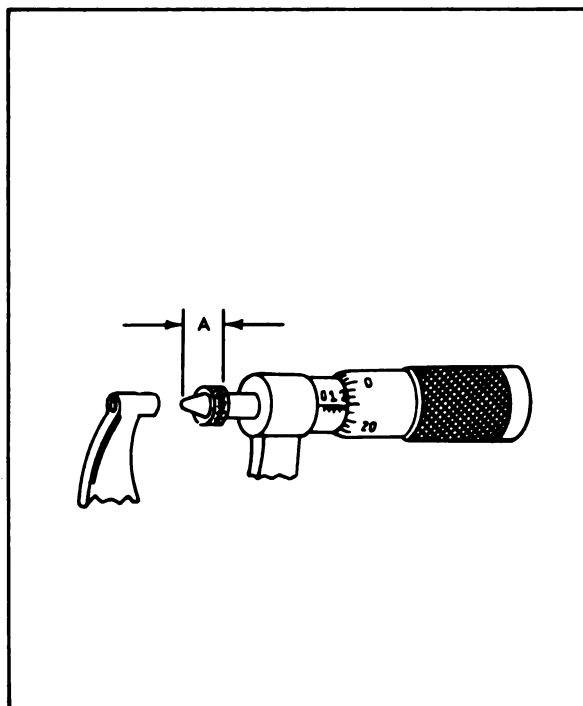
Modifying Hand Micrometer for Indent Inspection
